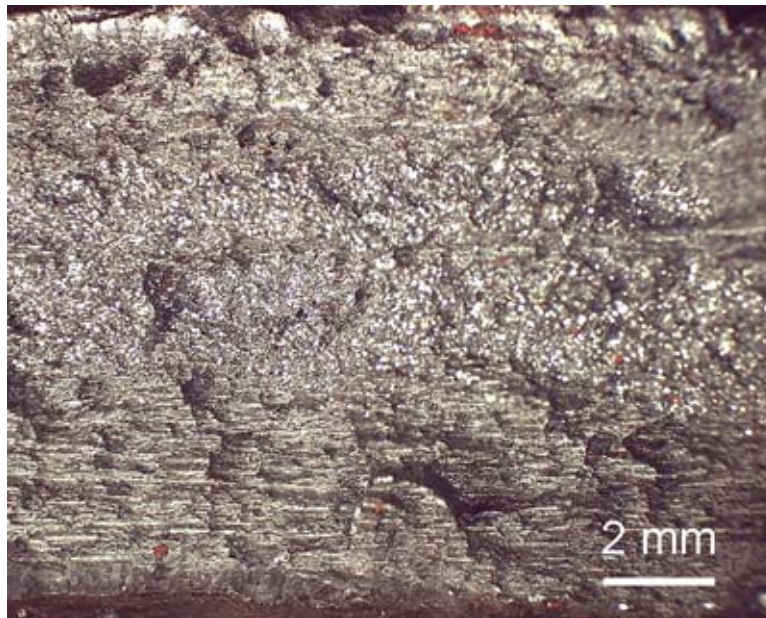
Fracture surface of top plate at head assembly end
